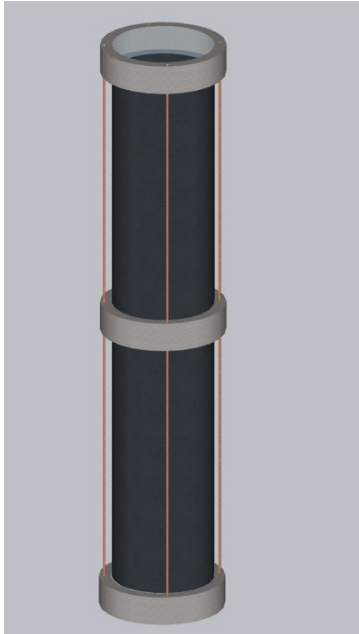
FLEX-hose Foldable pipe concept drawing with nylon sheet, concrete rings and steel cables
